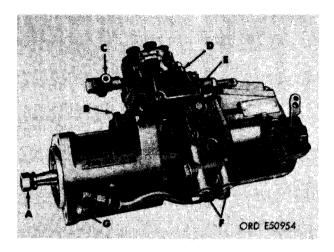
REMOVING OR INSTALLING PUMP FITTINGS (EARLY MODEL ENGINES).
